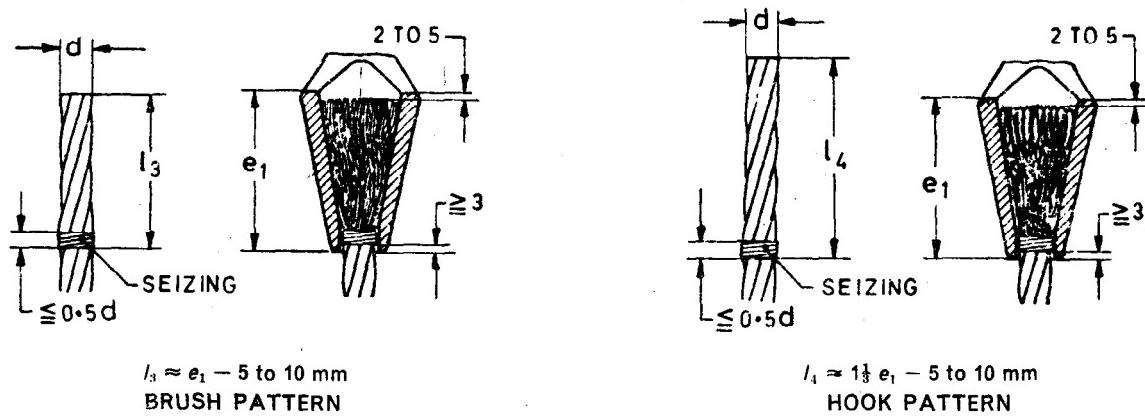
ARRANGEMENT OF SEIZING, SEIZING INSIDE SOCKET
